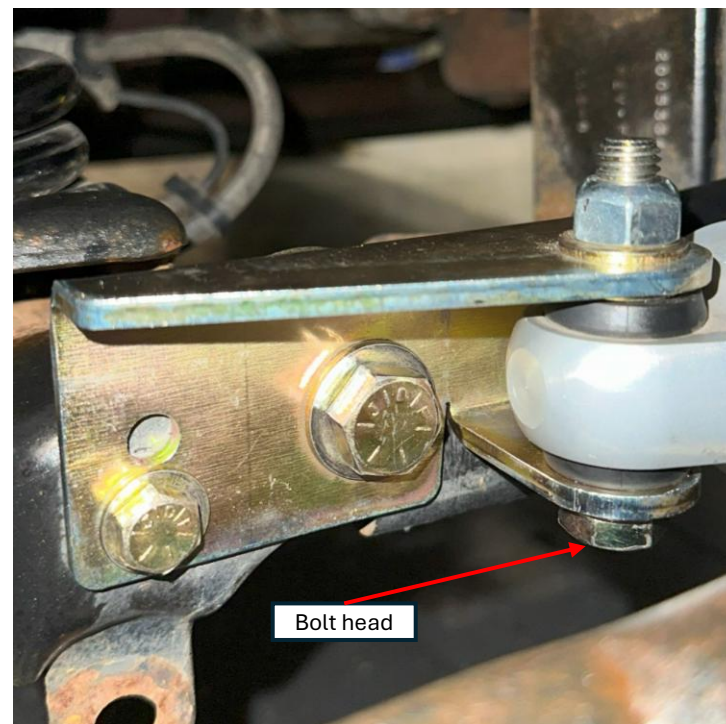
Steering stabilizer installed with the bolt head on the bottom of the bracket, and spacer washer installed
